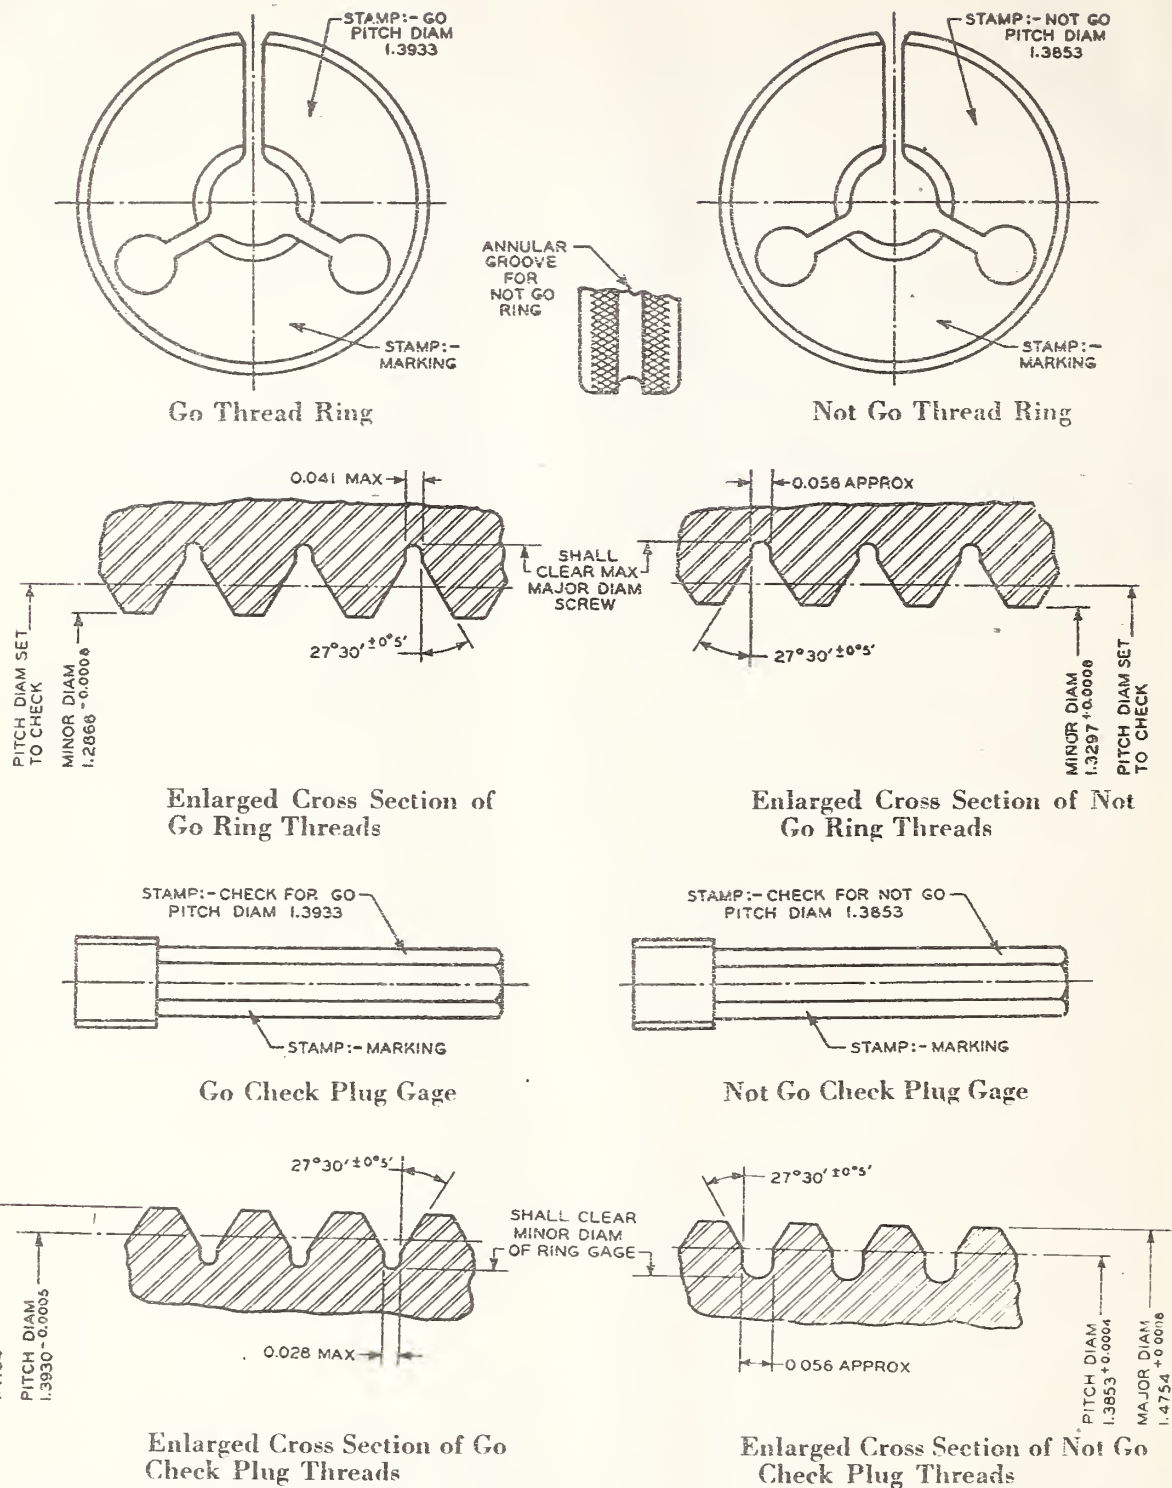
Gage data for "go" and "not go" thread ring gages and their checks for screw threads of Truncated Whitworth form; nominal diameter $1\frac{1}{2}$ inches; 6 threads per inch; class 2 tolerance.
